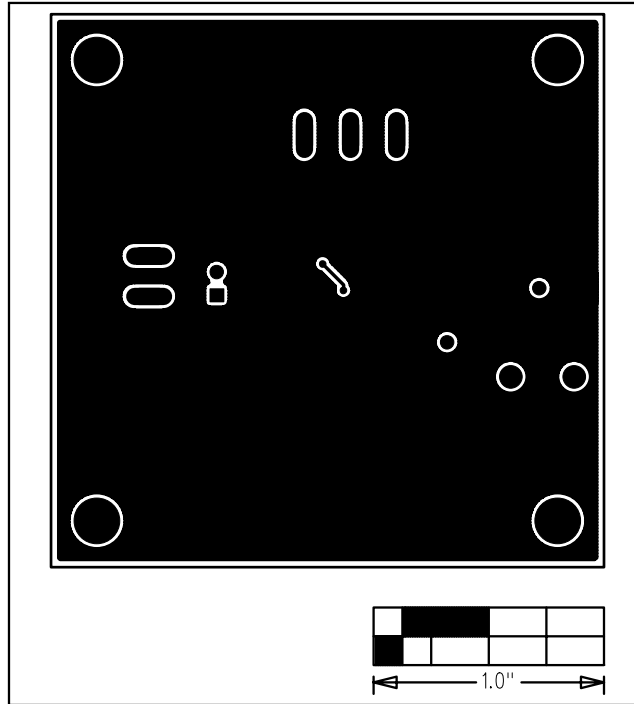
MAX9725E EV Kit PCB Layout—Solder Side
